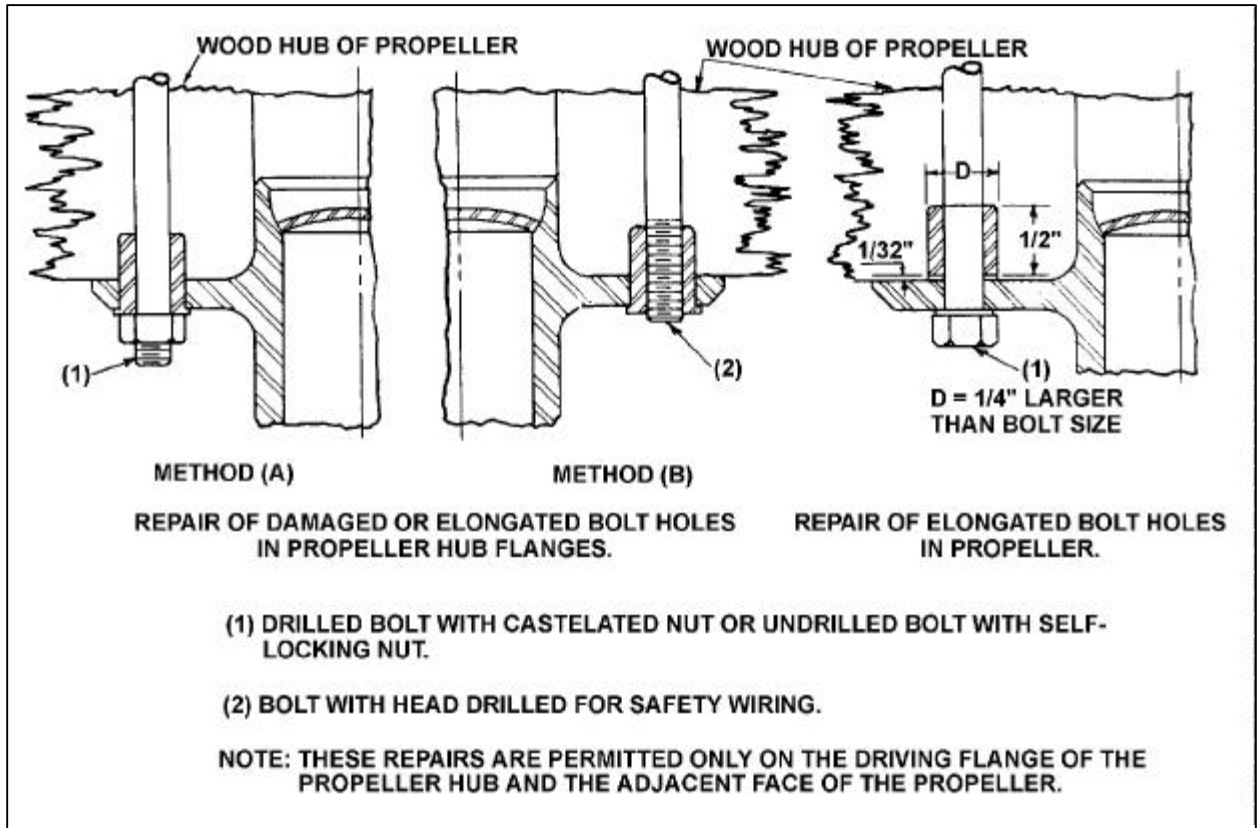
Repair of fixed-pitch hub and propeller with elongated or damaged bolt holes.
